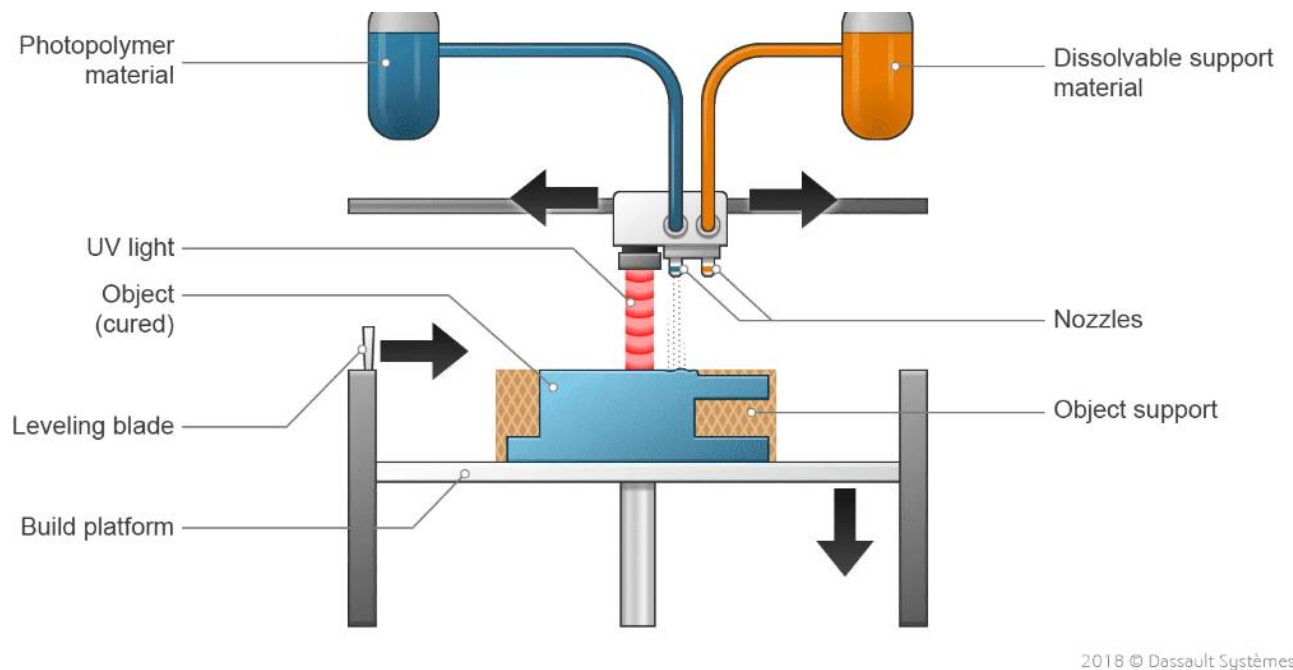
Material Jetting 3D printing manufacturing technique [23].
